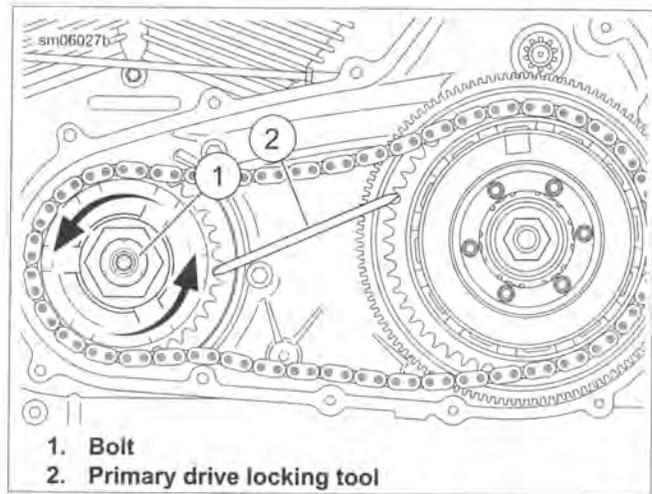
Removing Engine Compensating Sprocket Bolt
